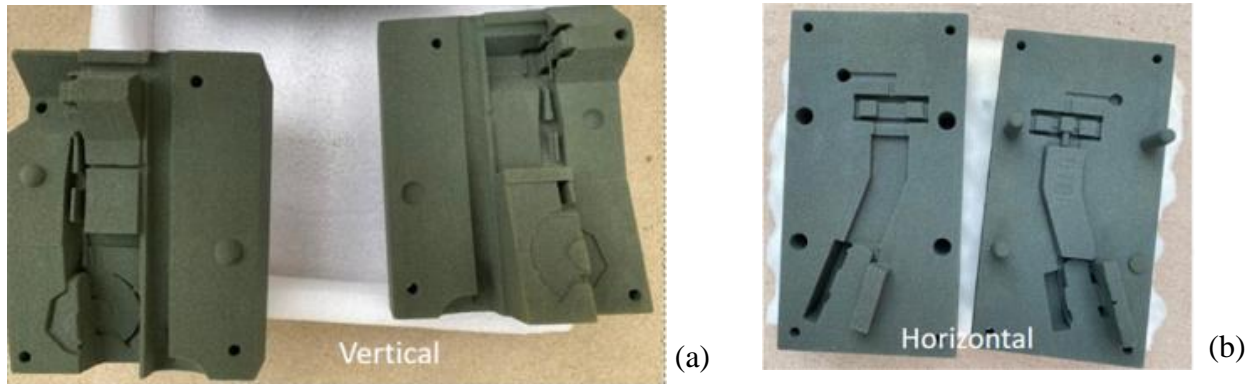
Result of 3D Printed Sand Molds after cleaning process: (a) and (b)
